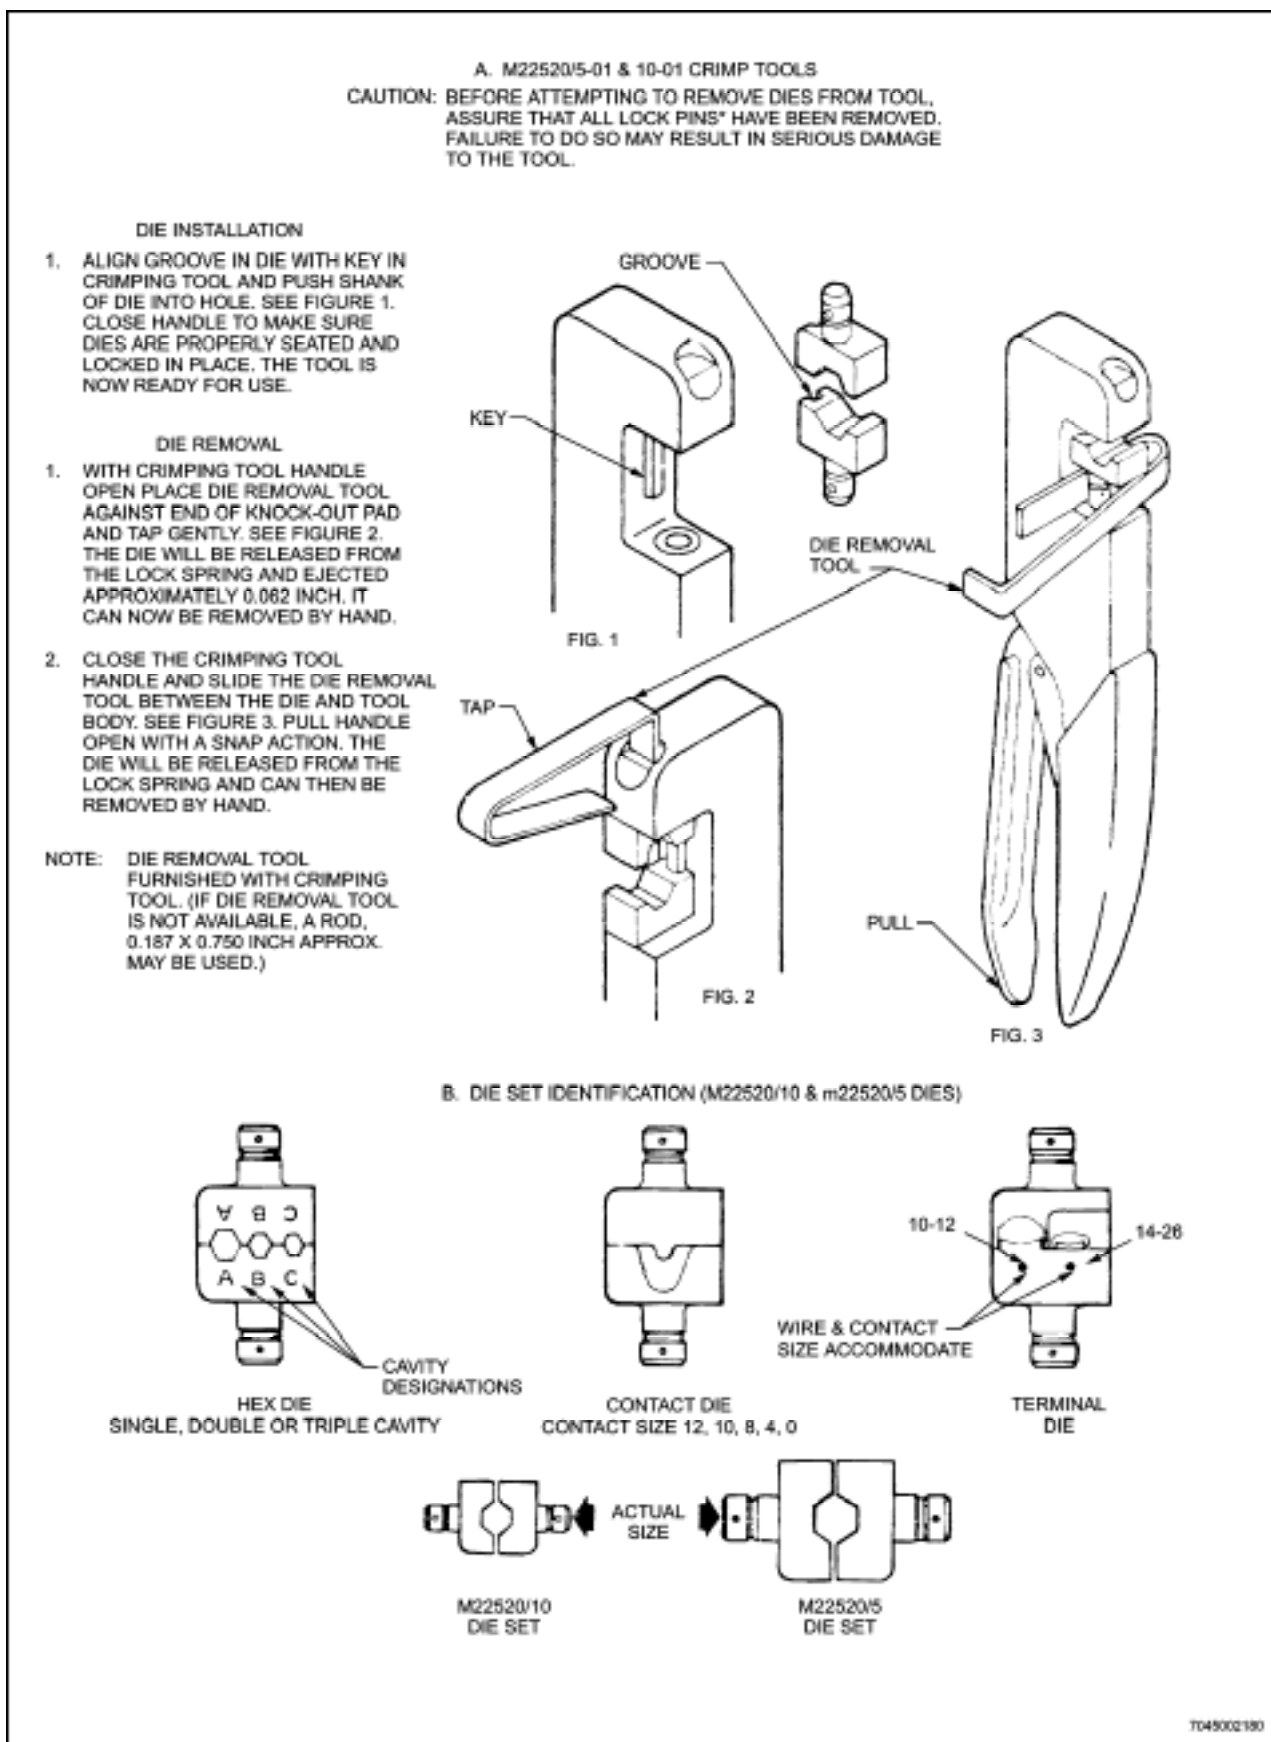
Crimp Tools and Dies (Sheet 1 of 2)
